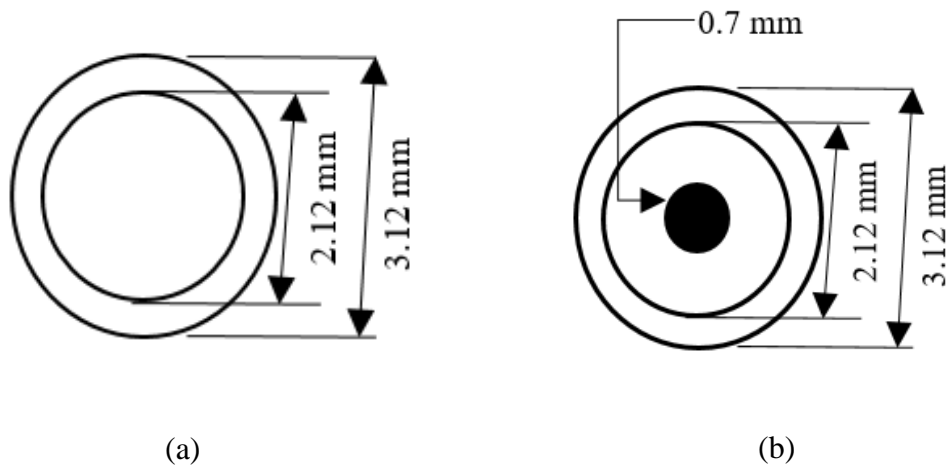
Inner tube cross-sectional view (a) With no wire insert (plain tube) CLPHP and (b) With wire insert (WI) CLPHP
